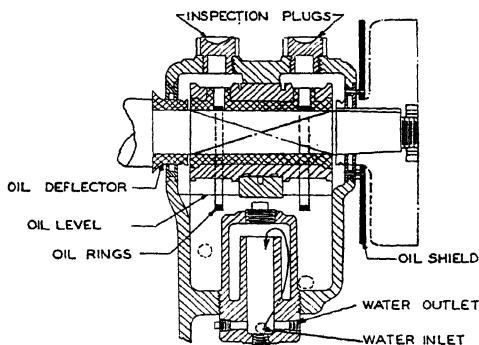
Water-cooled ring-oiled bearing of a steam turbine.
